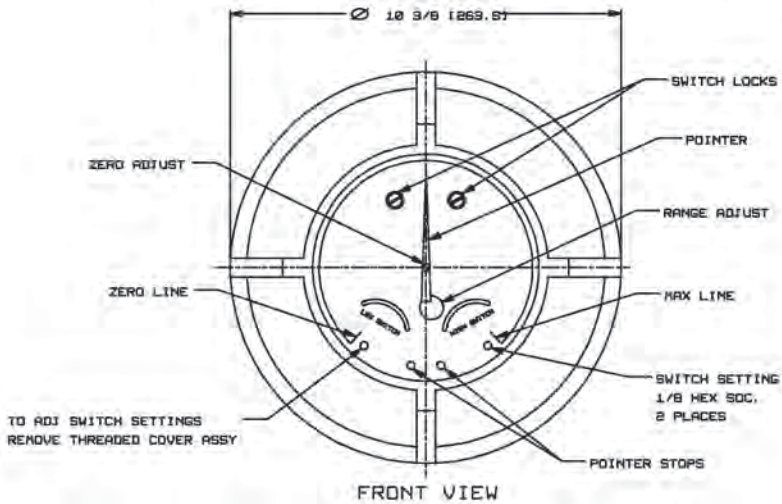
Model 291B Outside Dimensions (Part 2 of 2)
